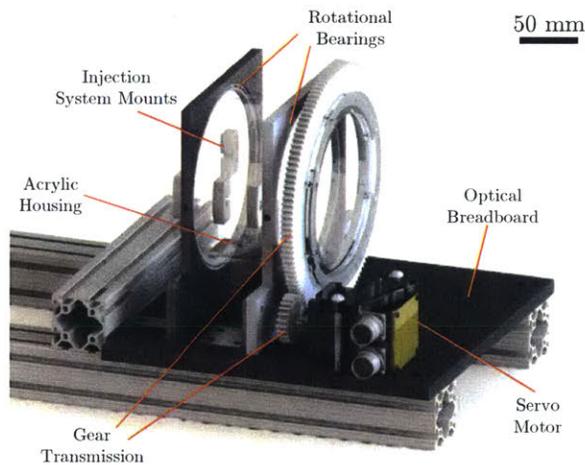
Rotational drive system CAD rendering. This subsystem consists of a rotating acrylic housing driven by a servo motor.
